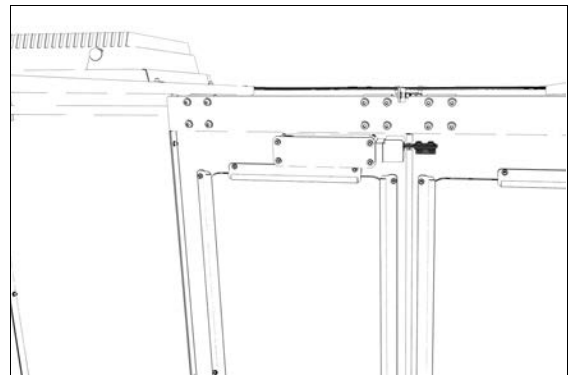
Lock key bracket attached. (Viewed from inside the enclosure.)
